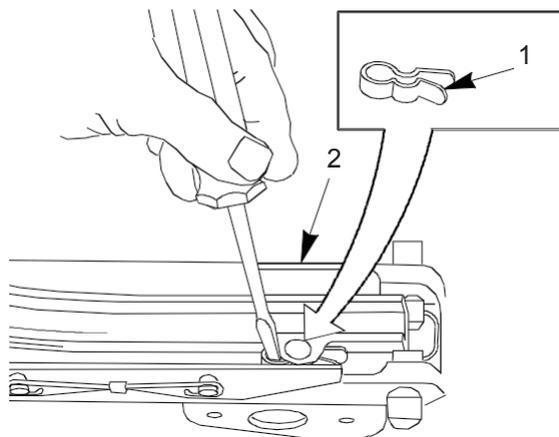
Retaining Clip, Cover and Feed Mechanism Assembly.
